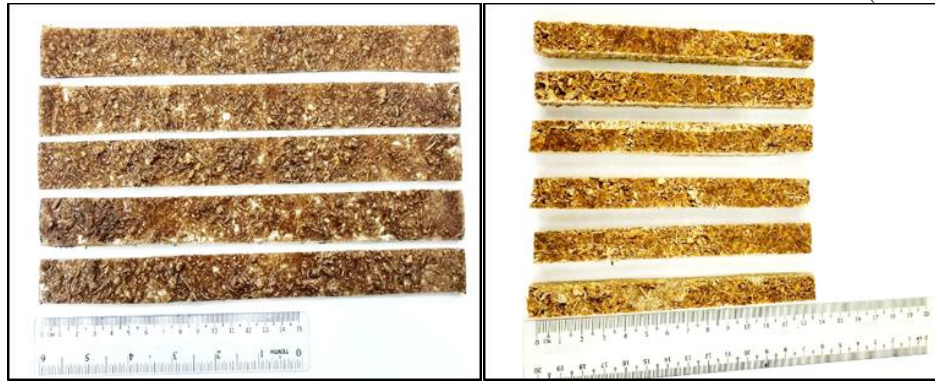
Tensile Samples (left) and Flexural Samples (right)
